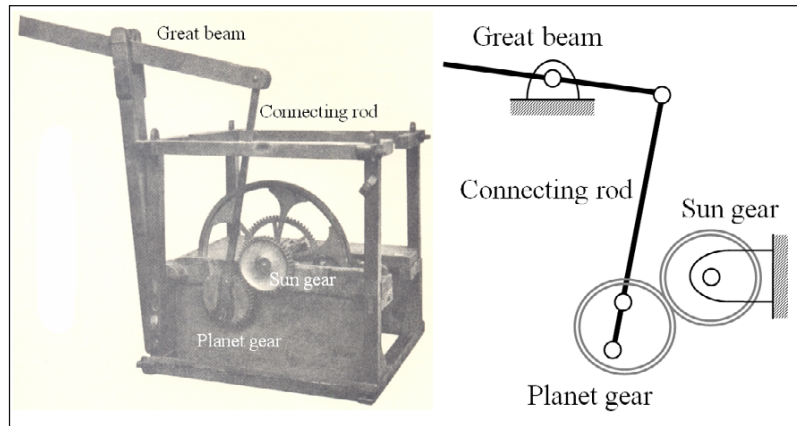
Watt's sun-planet gear linkage for converting reciprocating linear motion into continuous rotary motion. (a) Photograph [1]. (b) Schematic.
